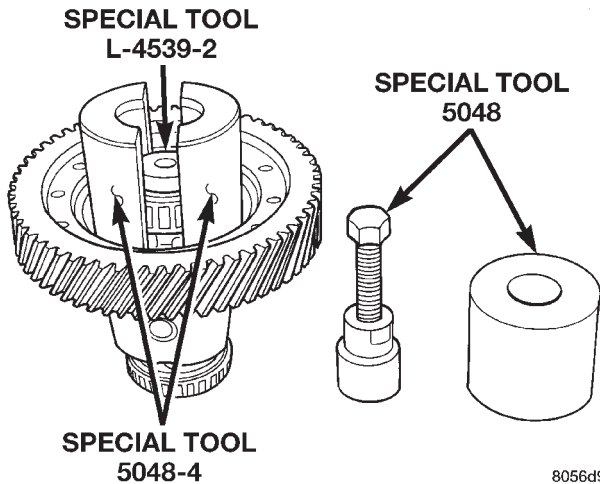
Position Button and Collets Onto Differential and Bearing (Ring Gear Side)
